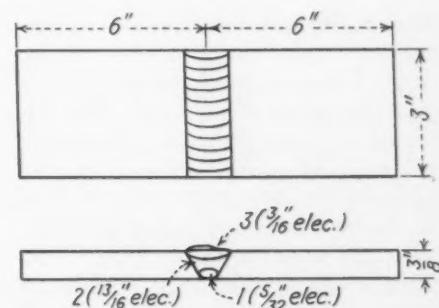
Method to follow to make a single vee butt weld between $\frac{3}{8}$ -in. plates by using flux coated electrodes.
